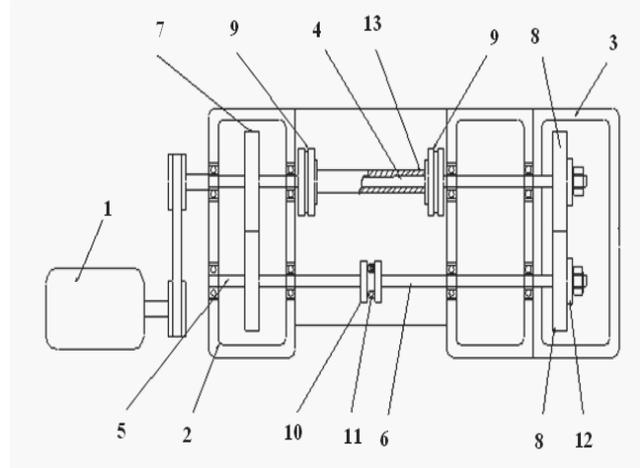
DC Motor, 2, 3: Gear box, 4, 5, 6: Shaft, 7: Circulating gears, 8: Pinion and gears (Test gears), 9: Coupling 10, 11: Load coupling 12: Washer, 13: Support tube
